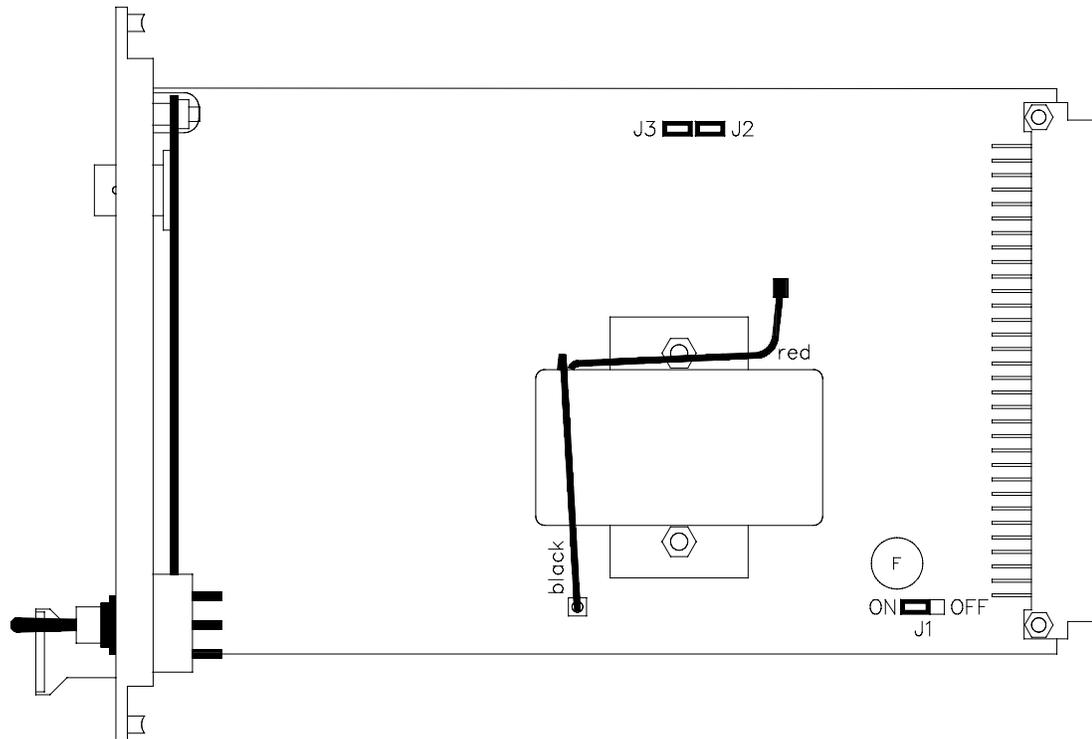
Jumper settings on 10006/2/2 module (08905 shown)
